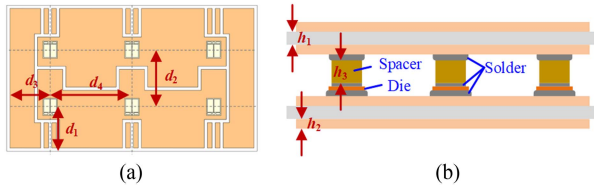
Key physical dimensions of the power module. (a) Substrate layout dimensions. (b) Thickness of each substrate layer.
